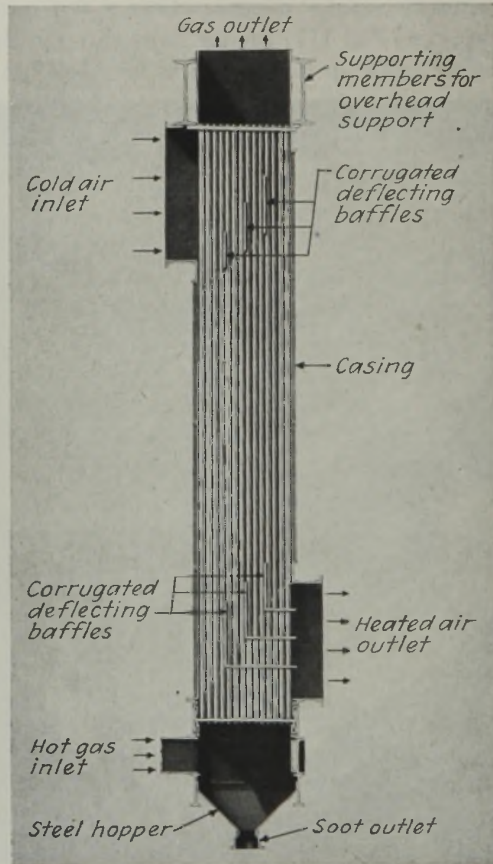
Babcock and Wilcox tubular-type air heater.
